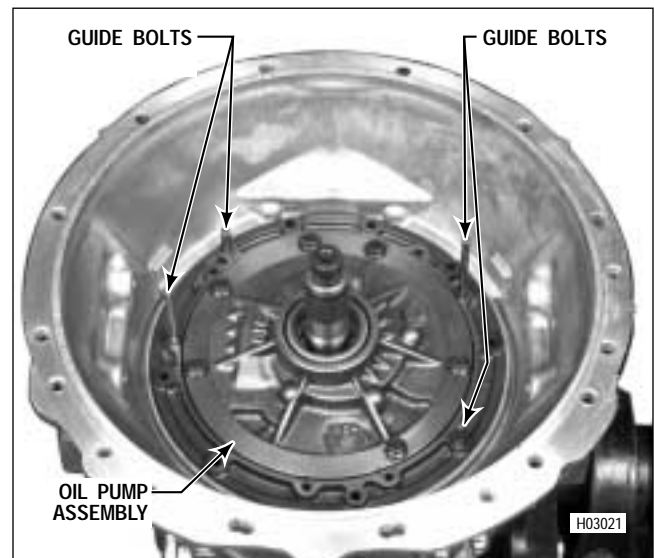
Installing Oil Pump Assembly (Models With Retarder)
